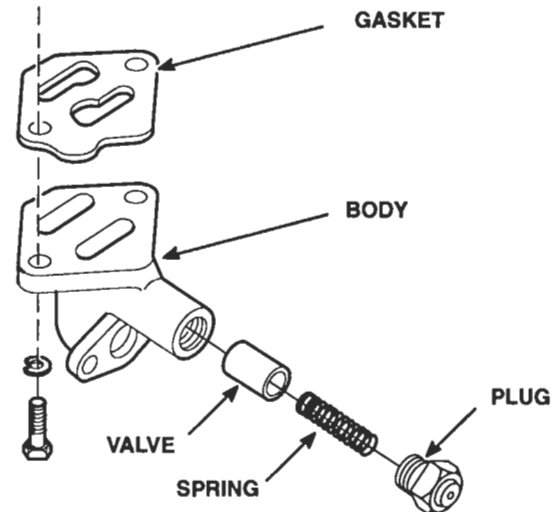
Lubricating Oil Pressure Regulator Details and Components
